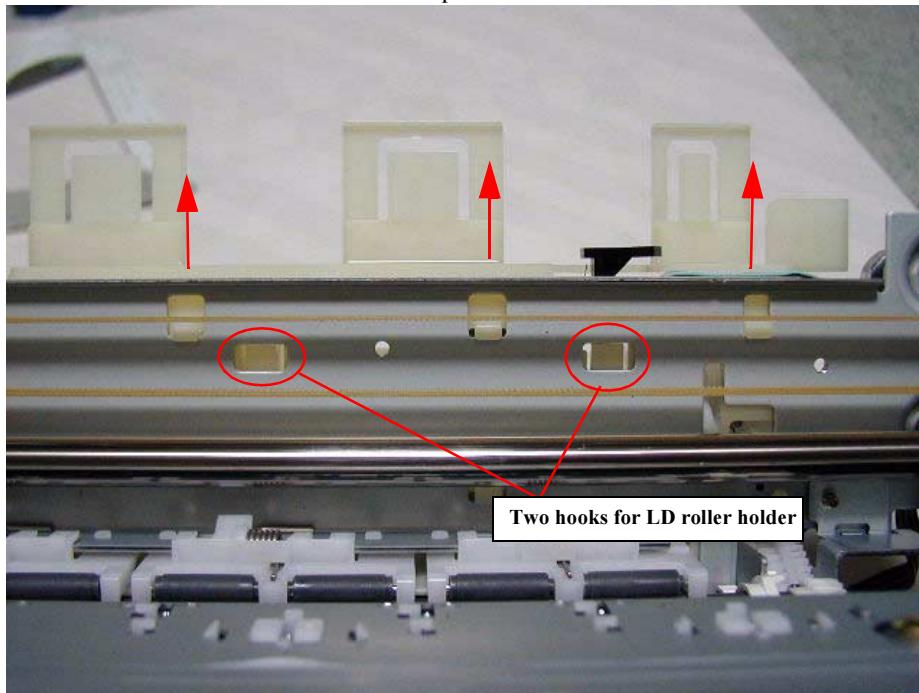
Pushing two hooks of the LD roller shaft holder
